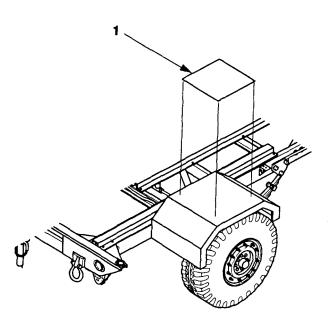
Cable Assembly W1 and W2 (Sheet 1 of 2).
